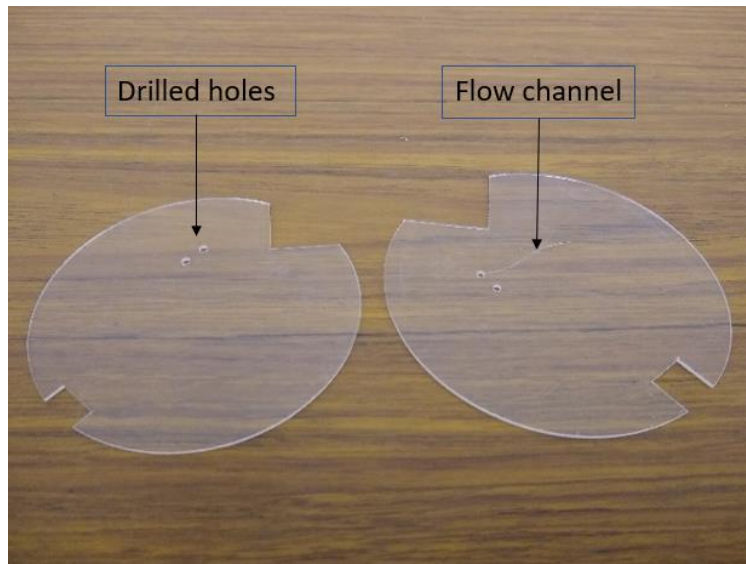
Machined acrylics; left: Lower acrylic cutout; Right: Upper acrylic cutout
